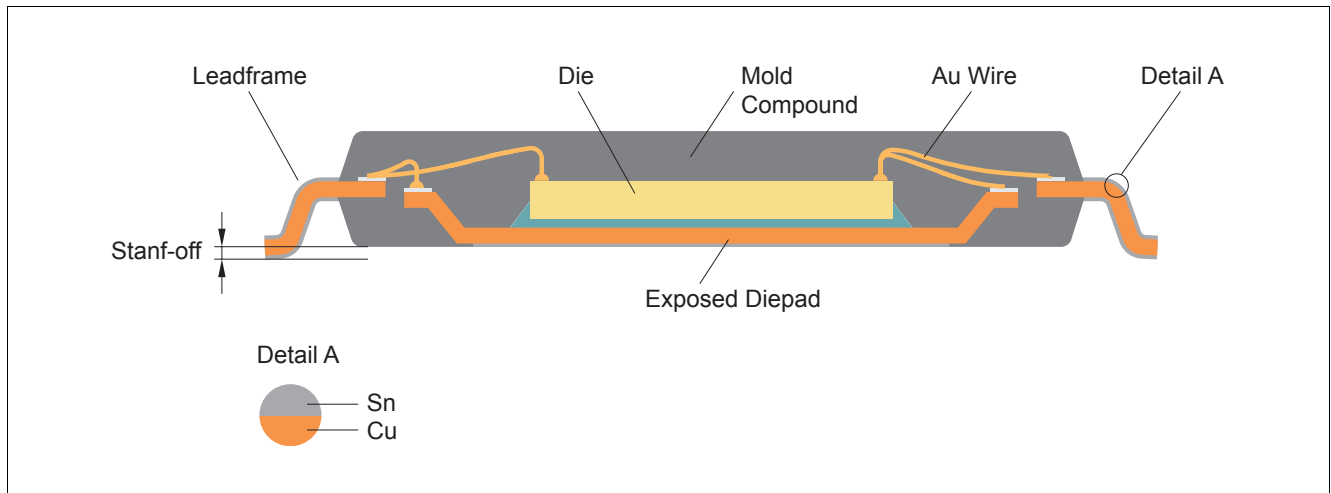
PG-LQFP with exposed die pad and external Sn-plating
